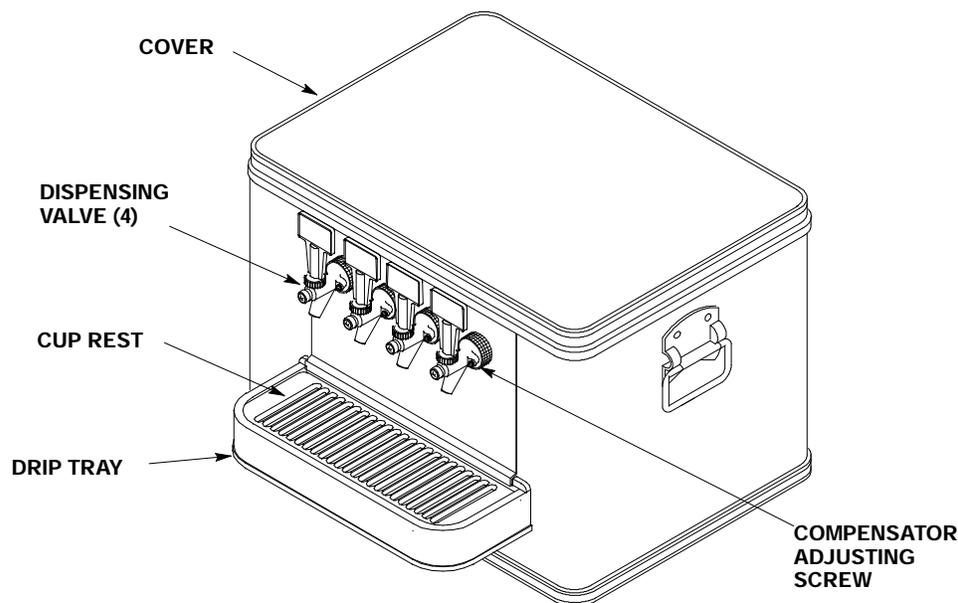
DISPENSING CHEST PARTS IDENTIFICATION
